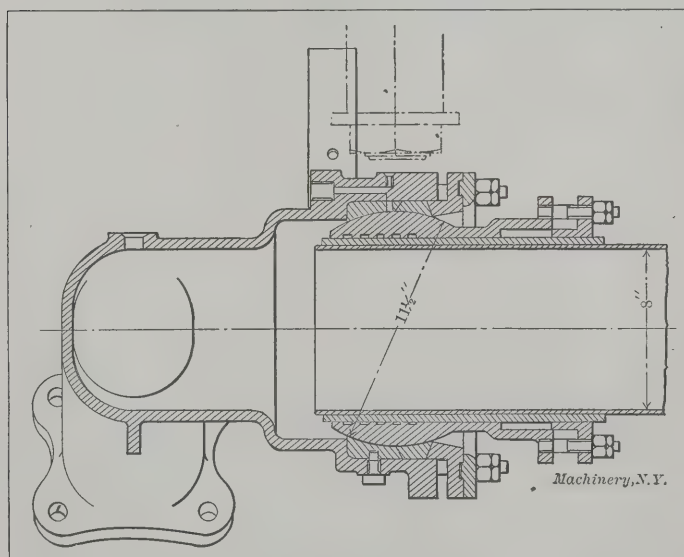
Ball and Sliding Joint Connection for High-pressure Exhaust
